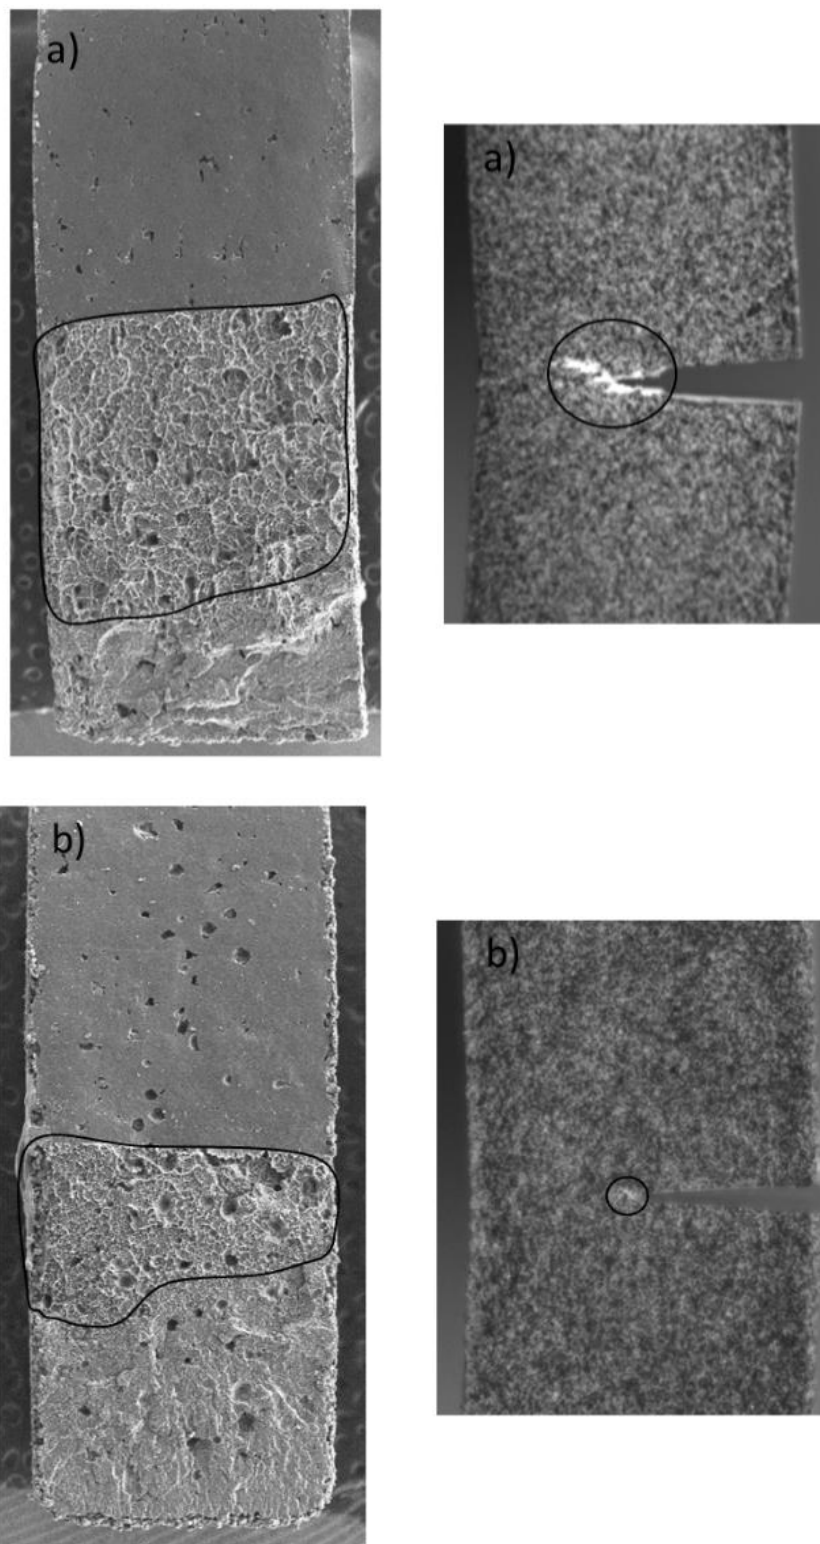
SEM images of the fracture surfaces and crack tip of a) parallel and b) perpendicular samples. In these images plastic deformed zone have been enhanced.
